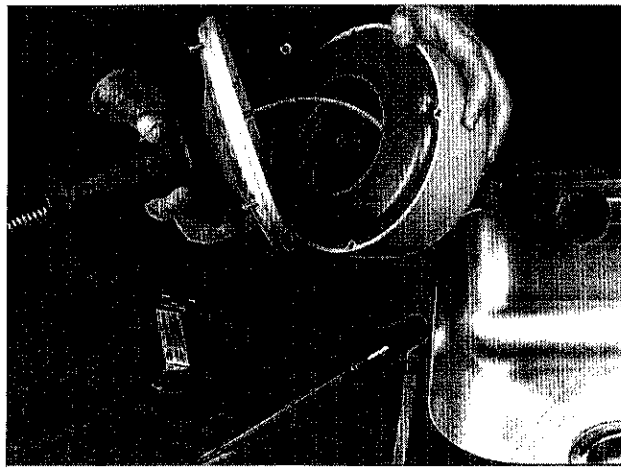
Pass exposed cable through front half and reassemble to back half of canister.
